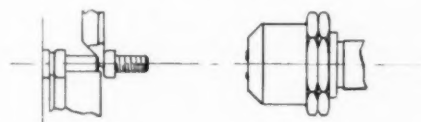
BRASS SCREWS PRODUCED IN AUTOMATIC THREADING MACHINE AT THE RATE OF ONE PER SECOND, INCLUDING MILLING OF SLOT IN HEAD
